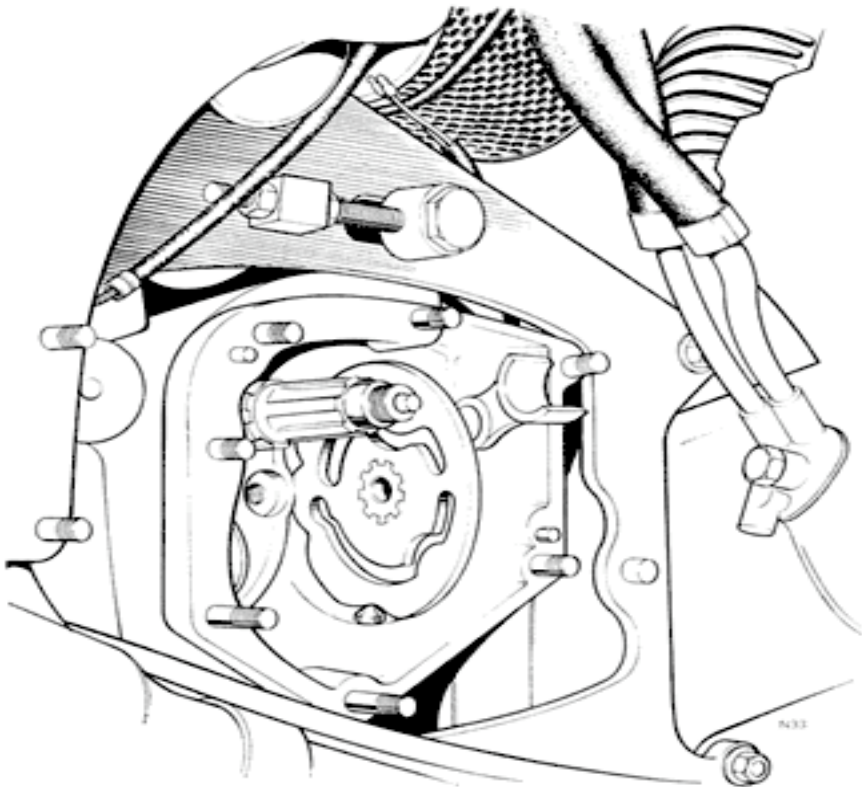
Removal of clutch body locking. Note alignment marks on locking and cover
